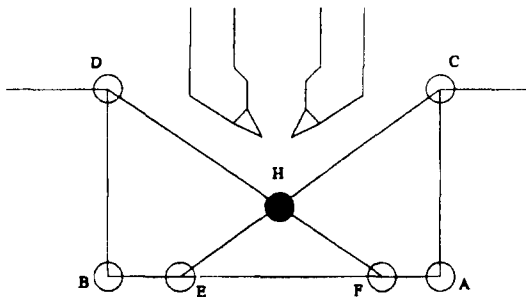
A intersection of taper cutting with No. 1 and No. 2 tool
